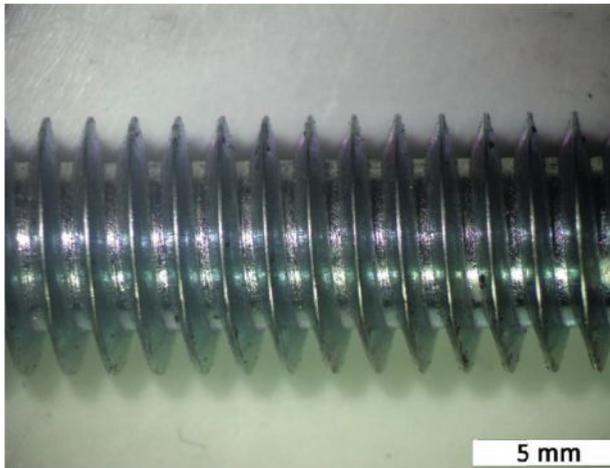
Nonconforming thread angle on threaded rod. This example shows a 38° thread instead of a required 60° thread.
